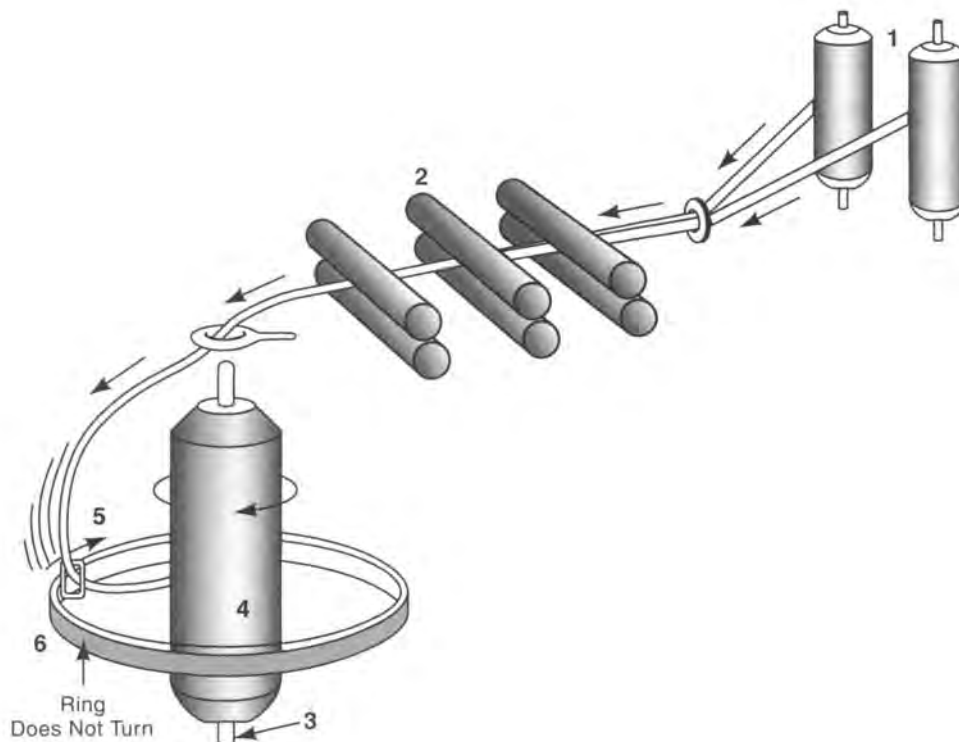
B5 Ring spinning. Spun sliver from the drawing operations, which is then called *roving*, and is wound on bobbins (1), and is fed through another series of drawing rollers (2), that further draw the strand to its final desired thickness. A larger bobbin (4) on a rotating spindle (3), turns at a constant speed. The speed of the final pair of drawing rollers is set at the speed that delivers the yarn so that it is twisted by the desired amount as it is wound on the bobbin. The yarn is guided by the traveler (5), which slides around the bobbin on the ring (6). Because of some drag on the traveler, the yarn winds on the bobbin at the same rate of speed as it is delivered by the final pair of rollers. (Illustration used with permission, Dan River Inc.)
